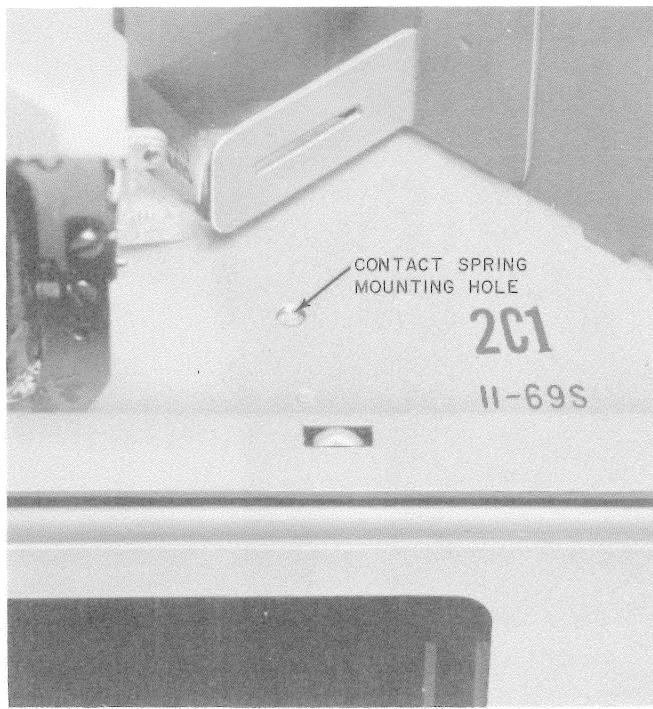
Location of Contact Spring Mounting Hole in 2A/2C Telephone Sets
